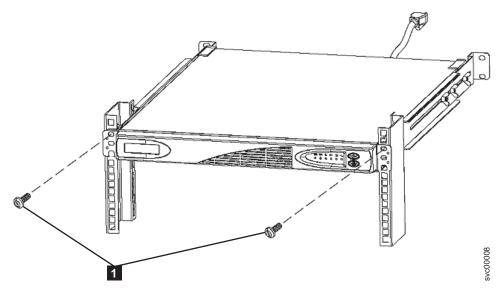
Installing the mounting screws for the uninterruptible power supply 5115
